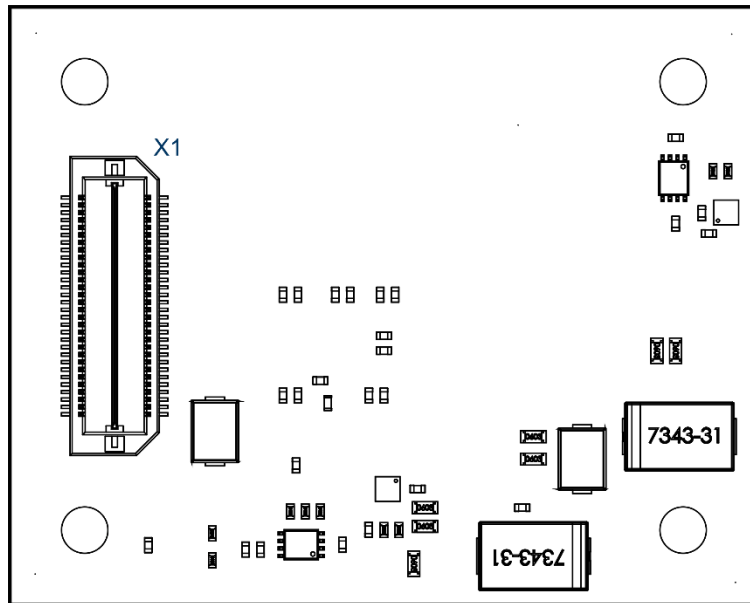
Verdin DSI to LVDS Adapter – Bottom Side
